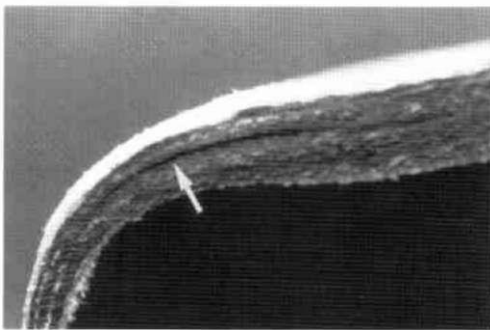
Photograph of a cross-sectional view of an "inter-laminate" shear type failure.
